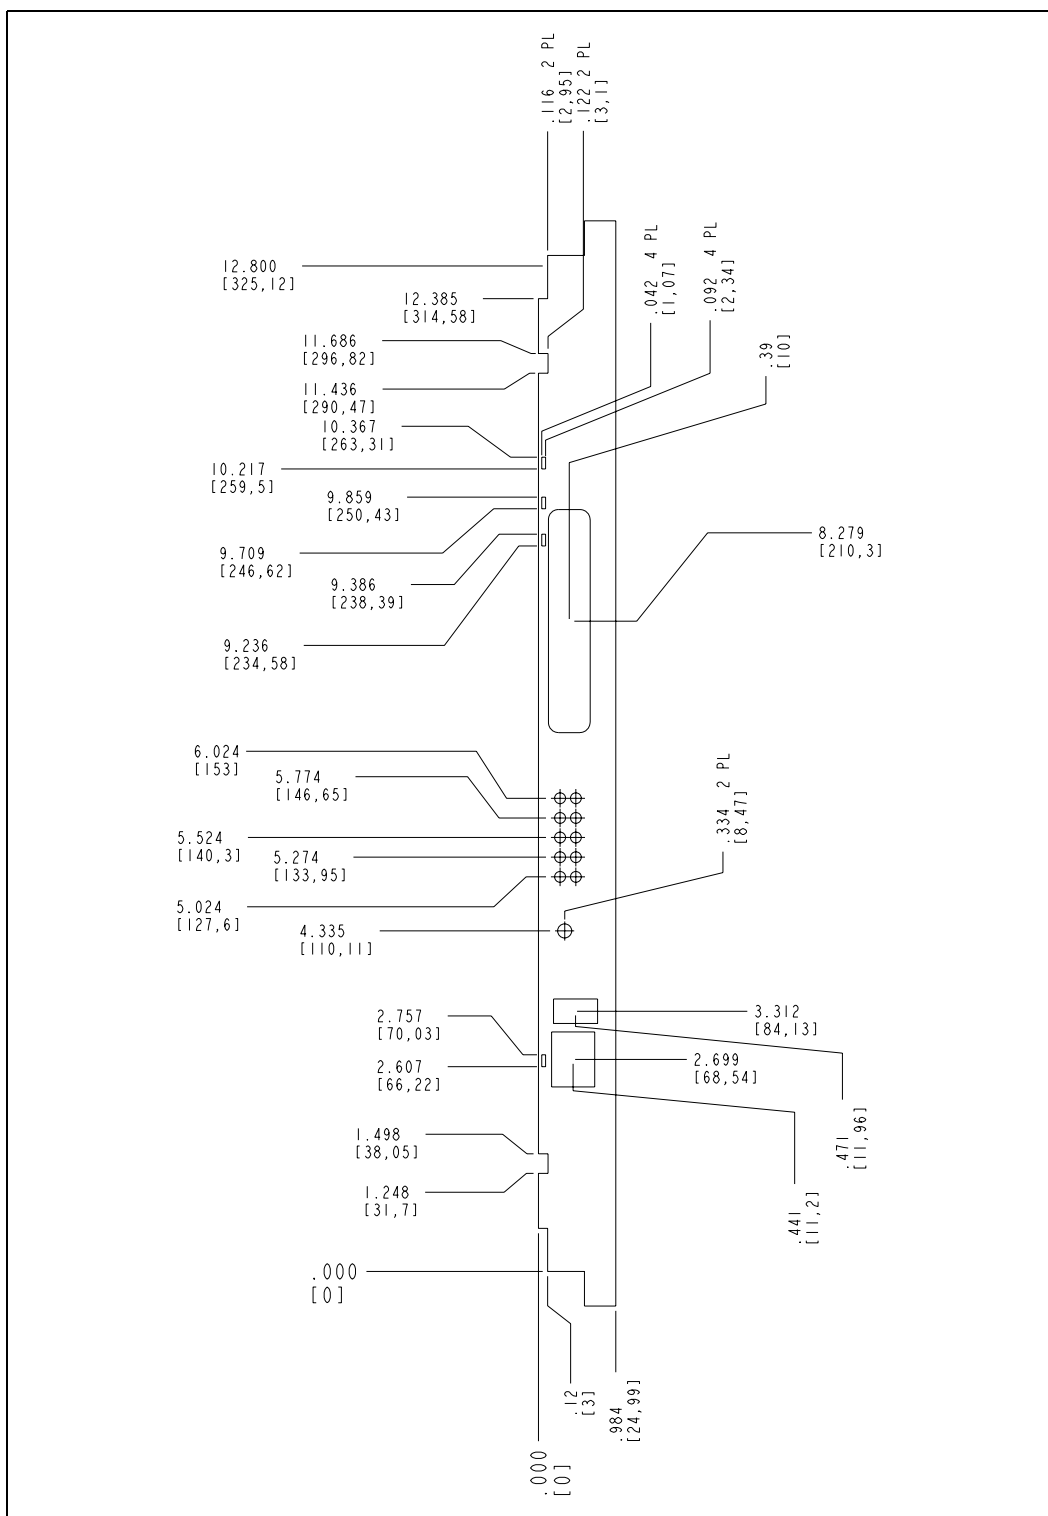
MPCBL0001 SBC Front Panel Dimensions – Non-FC SKU (Screws and LED)
